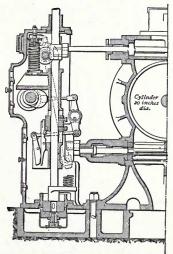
Corliss valve-gear by Hick, Hargreaves & Co., Bolton.
